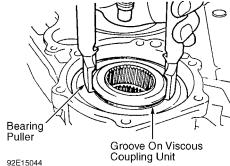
Removing & Installing Viscous Coupling Unit Courtesy of Mitsubishi Motor Sales of America.
